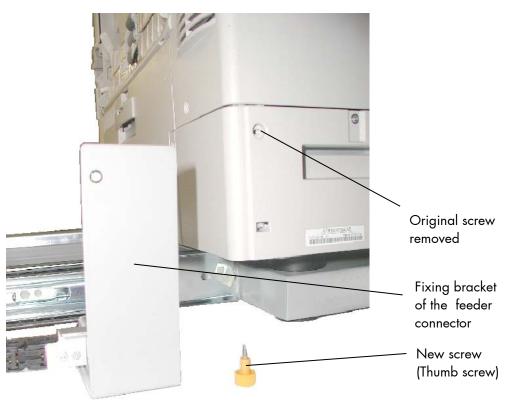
b Preparation before connecting printer and Fanfold Unit
